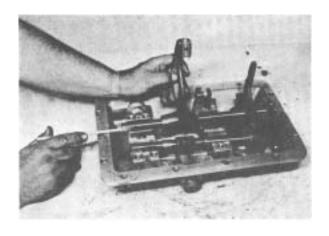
Install interlock cross pin in 2nd & 3rd shift rail. Position 2nd & 3rd shift rail and fork assembly in rail groove over mesh lock ball and spring. Make certain cross pin is in position in rail. (See Figure 13-A).
